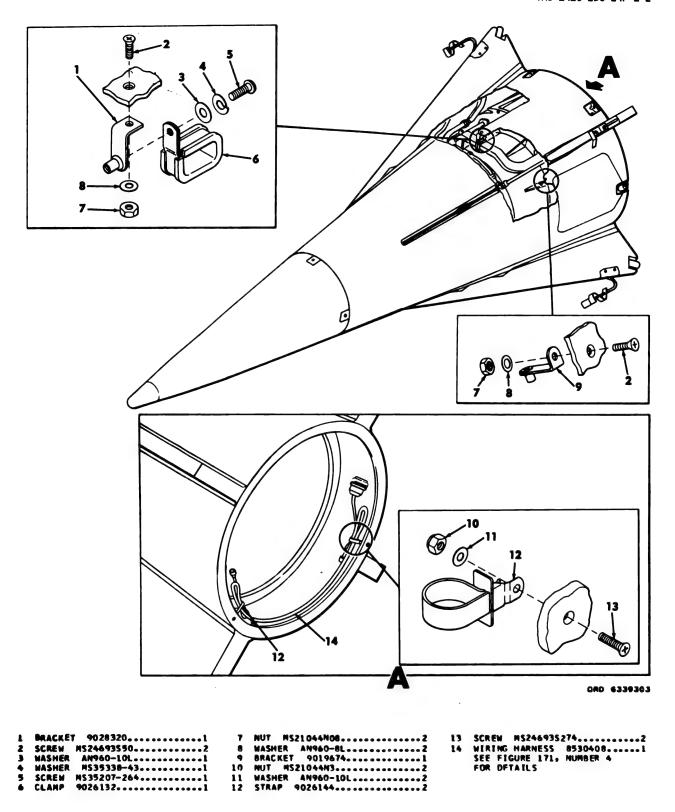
EQUIPMENT INSTALLATION, FORWARD BODY ASSEMBLY /9020575 AND 9979613/
